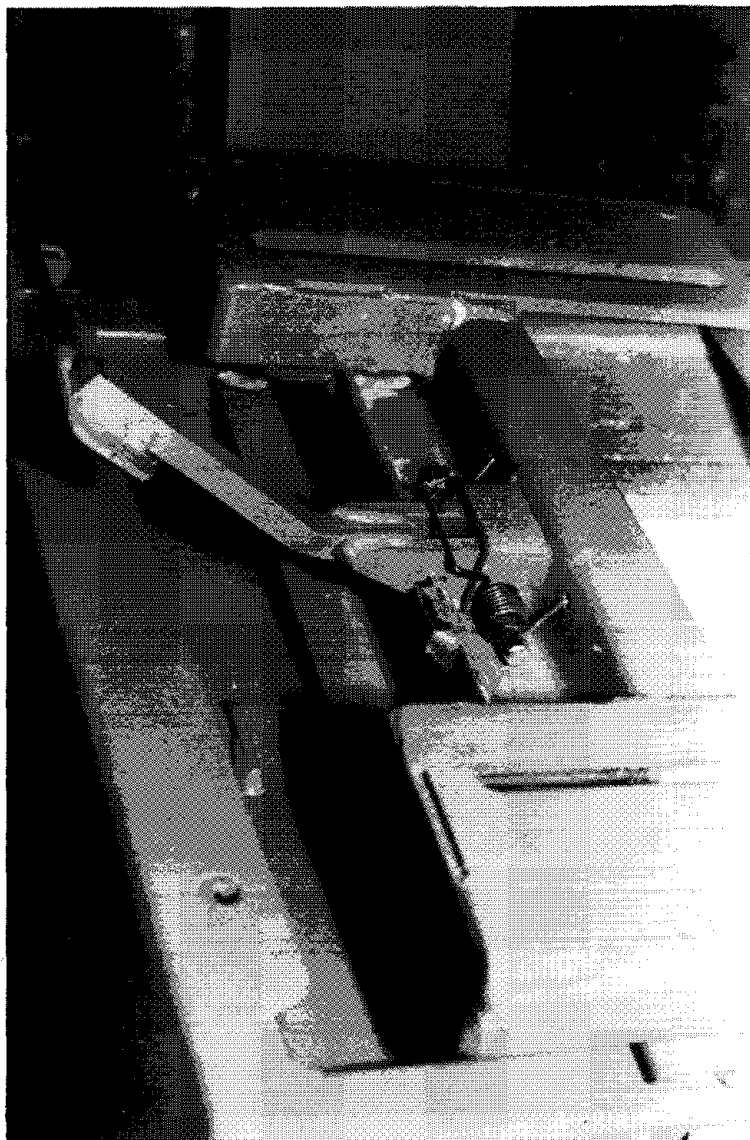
Locking Mechanism Photograph, Mechanism in the Locked Position
